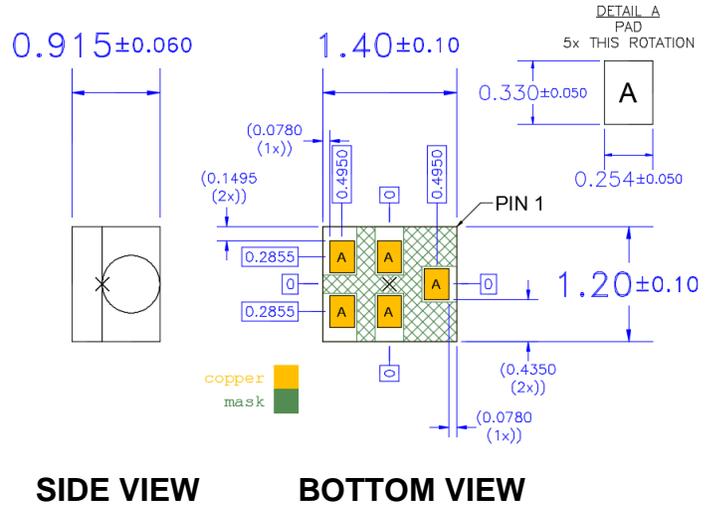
PCB Footprint Recommended Solder Mask Pattern
